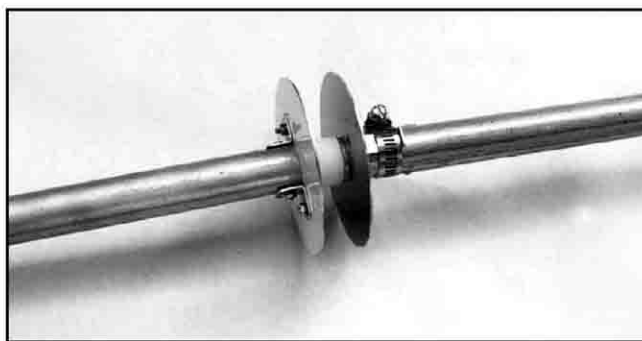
Detail of the tuning disk construction. The fixed disk is held in place with a screw through the assembly, and the movable disk is clamped using a stainless hose clamp. A Teflon spacer provides support and high voltage insulation.
